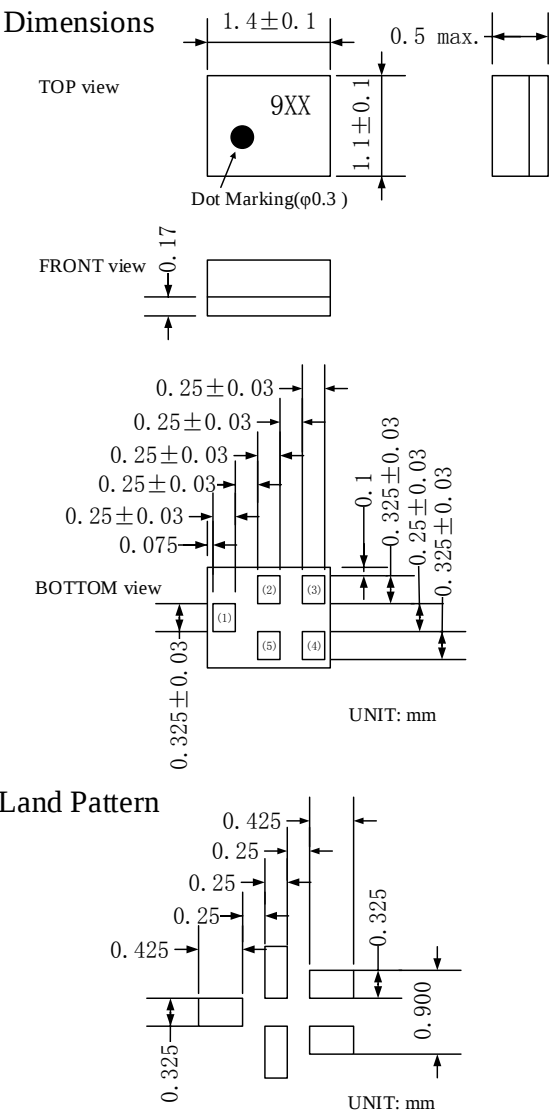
Drawing of package with package height A = 0.5 mm (max.)
